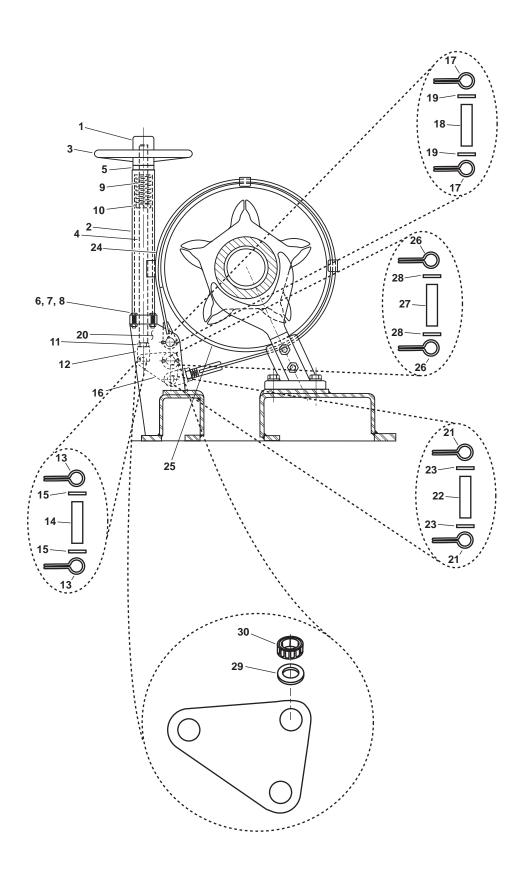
Anchor Windlass Brake Stand and Brake Band Assembly
